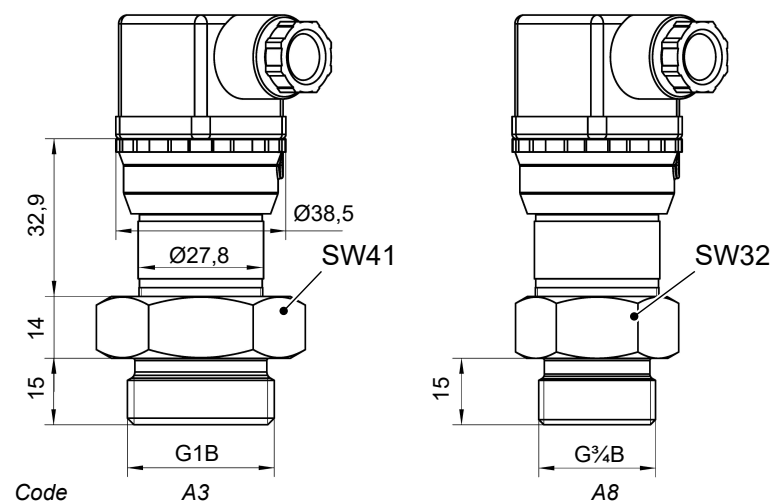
Dimensional drawing 'almost front-flush sensor'
